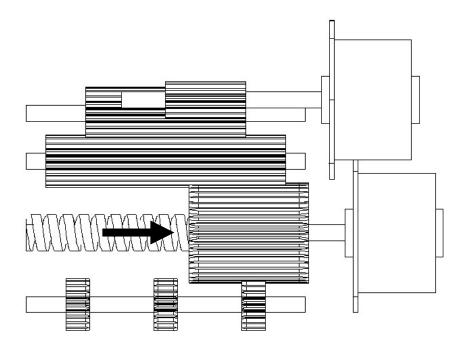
Step 3 - Print Head Compressing of concept 3
